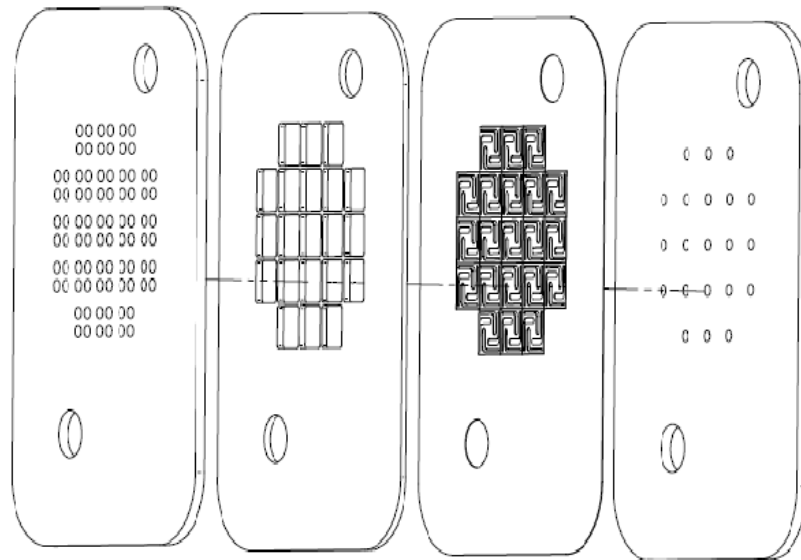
Design of the miniature reed valve array layers: outlet layer, spacer layer, valve layer, and inlet layer (left to right). Two large holes are provided on each part for alignment pins.
